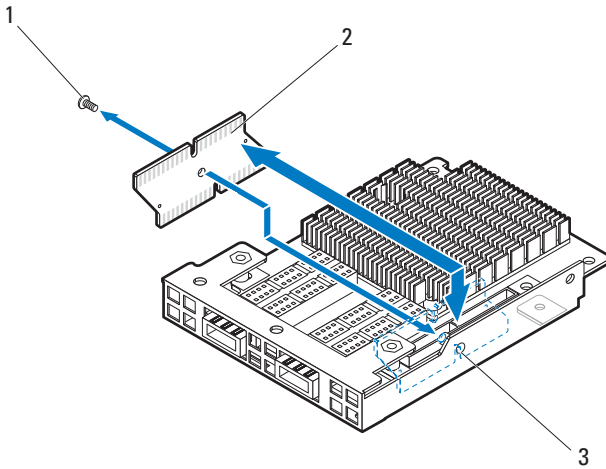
Removing and Installing the Infiniband Mezzanine Card Assembly
